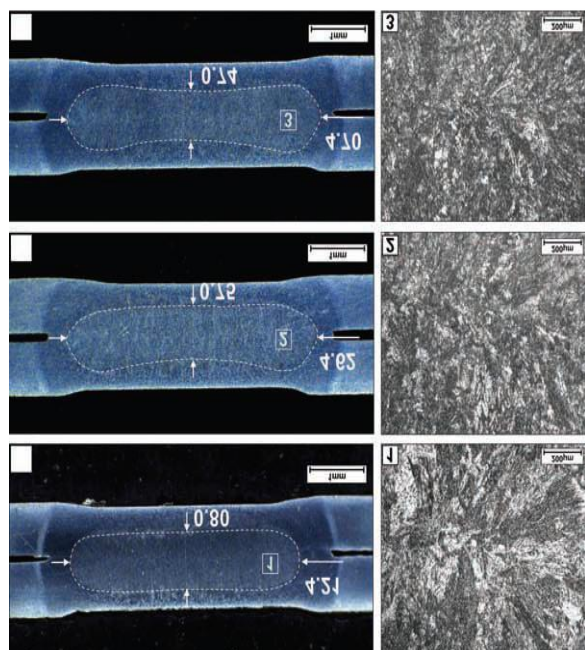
Nugget diameter growth process along with the welding time (welding current, 6.0 kA; welding time, 150 ms; WD, 3 mm).
